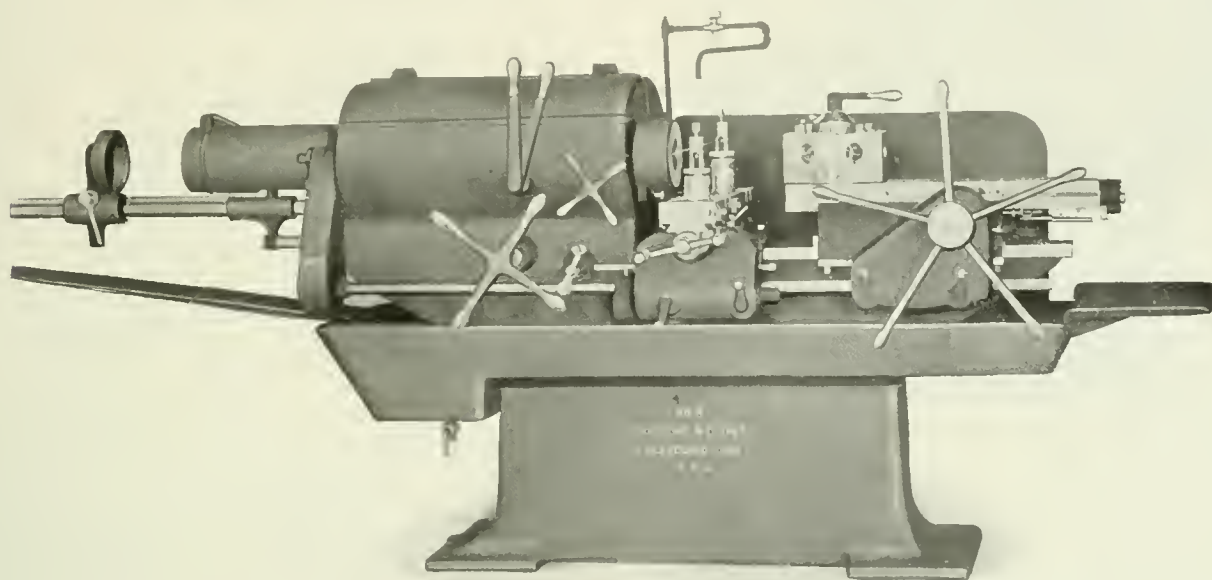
Bardons & Oliver No. 8 Motor-driven Geared-head Lathe
